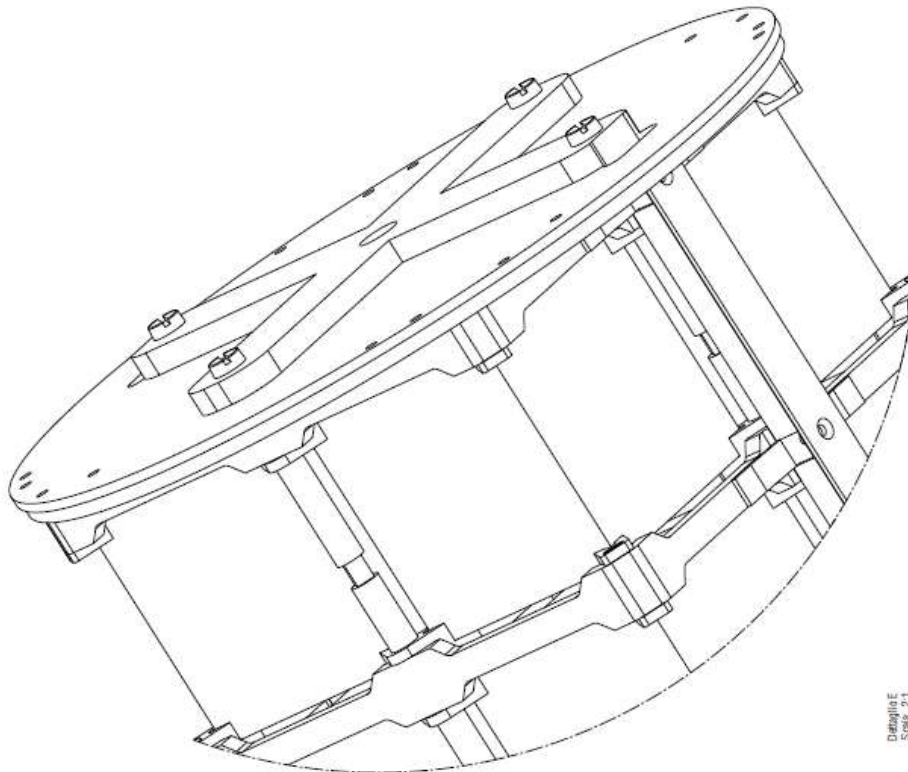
Drawing of a CUORE Single Module connected to the top plate of a tower.
